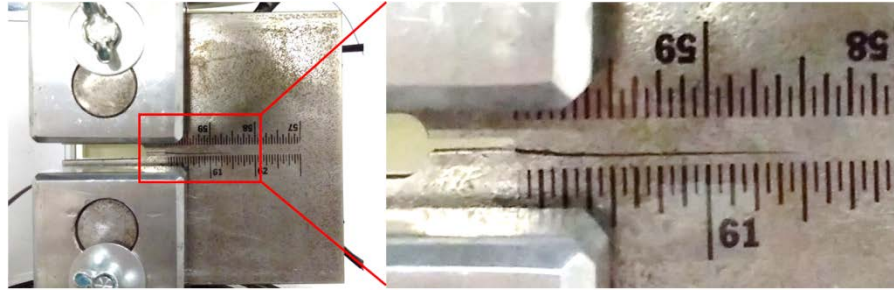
Fatigue Crack Developed in the Specimen
